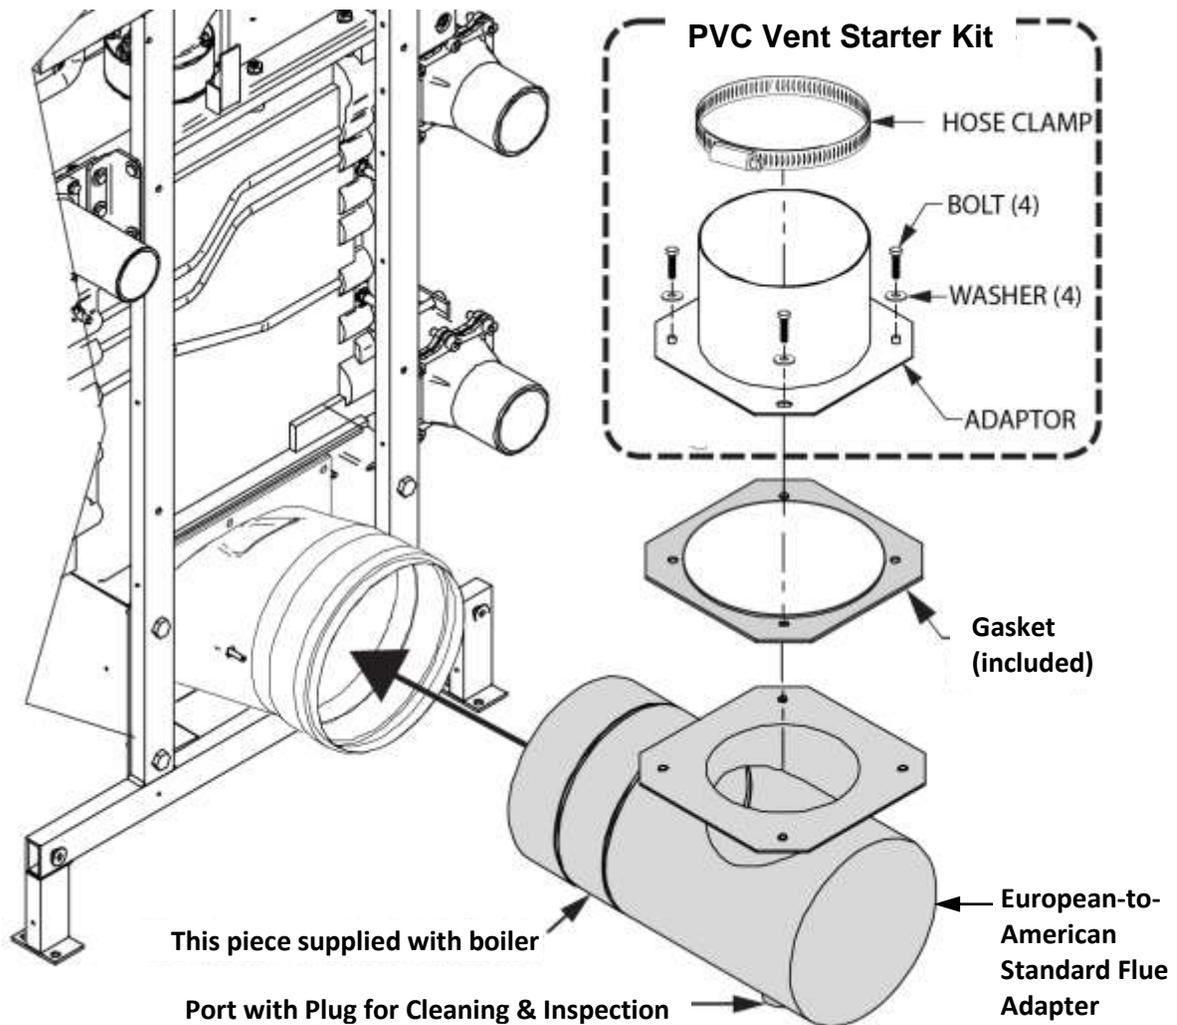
Flue Exhaust Diameter Reduction Adaptor Kit and Parts
